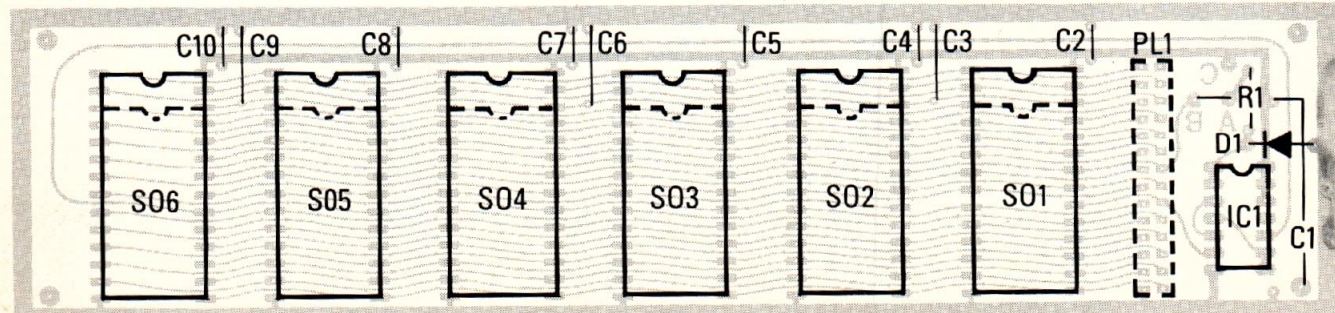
MOUNT ALL PARTS except PL1 on the component side of the board. The jumper connecting points A and B disables reading from sockets SO2-SO6.
